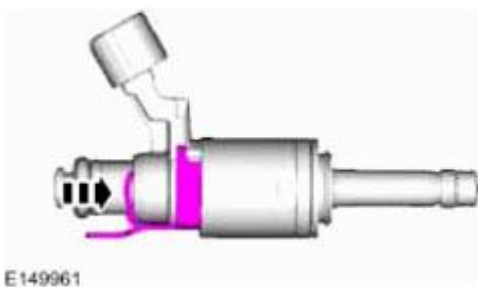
Lubricating Upper Fuel Injector O-Ring Seal Support Rings And Upper Fuel Injector O-Ring Seals
